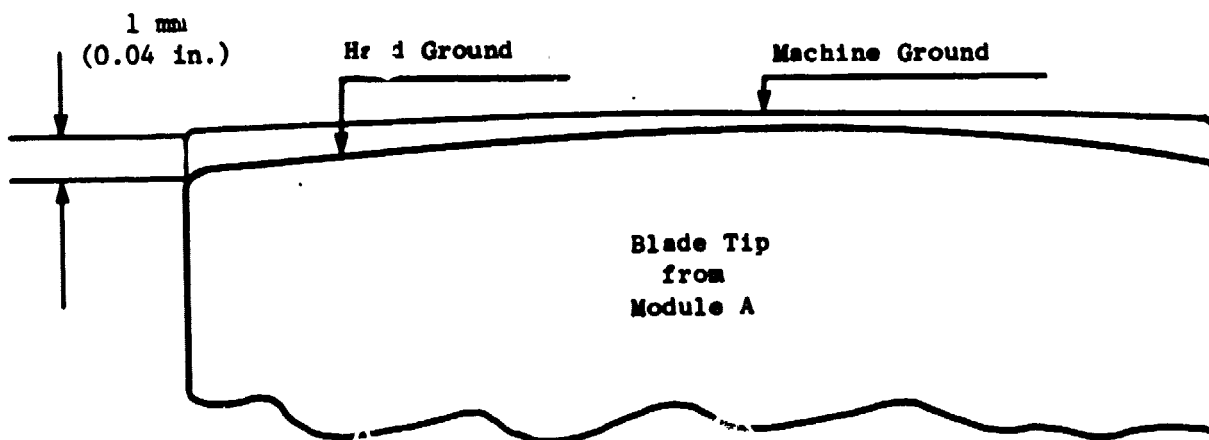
Because of Casing Out-of-Roundness, Hand Grinding of Blade Tips at Assembly Produces Shorter Blades than Necessary.
